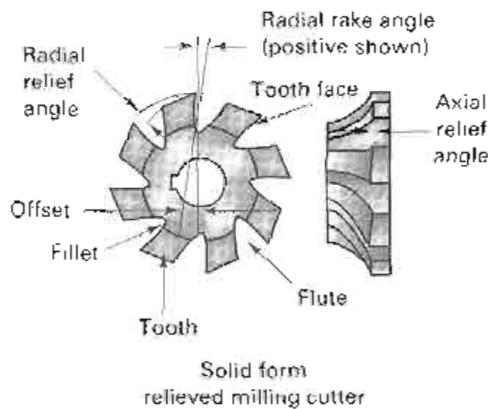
Solid form relieved milling cutter, would be mounted on an arbor in a horizontal milling machine.
